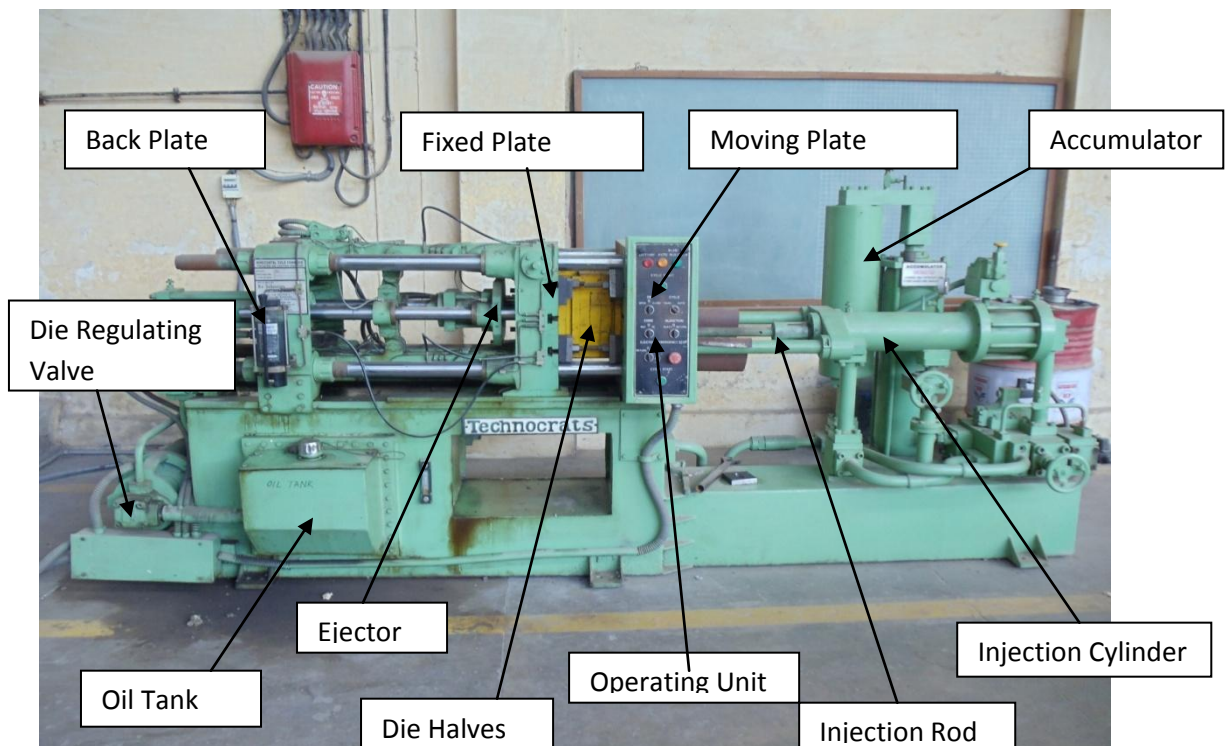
High Pressure Cold Chamber Die Casting Machine (80 Tons) at Thapar University
